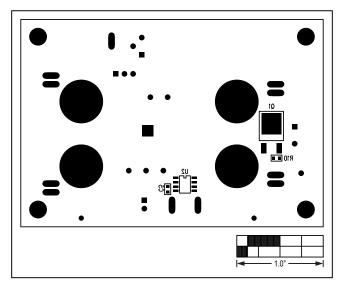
MAX15091 EV Kit Component Placement Guide—Solder Side
